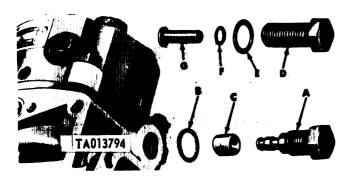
Removing oil filter or oil duct sealing screw assembly (code F and G pumps).
